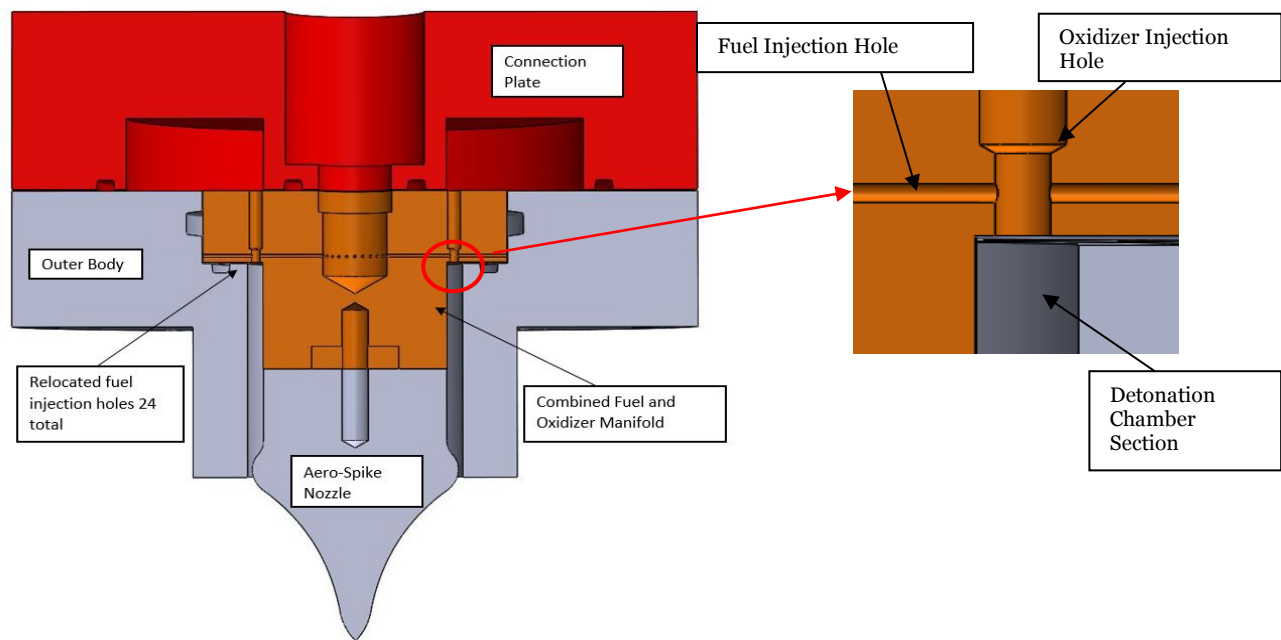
Cross section view highlighting relocated fuel injection holes (top) and outerbody-less picture of combined fuel and oxidizer manifold installed on connection plate.
